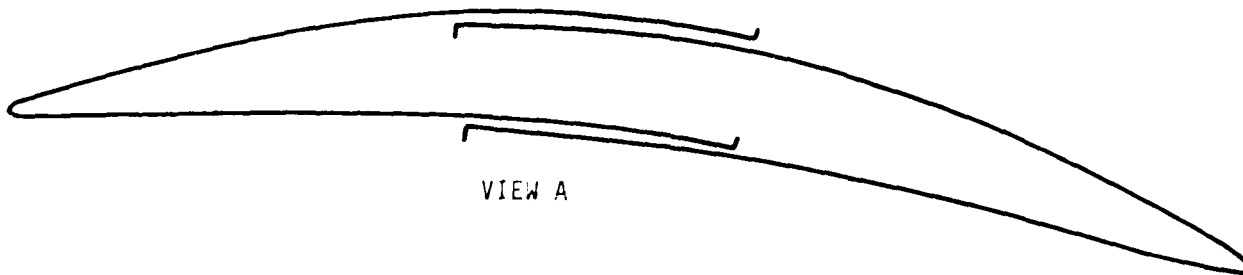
Stage 1 Blade With Sections as Defined on Engineering Drawing.
